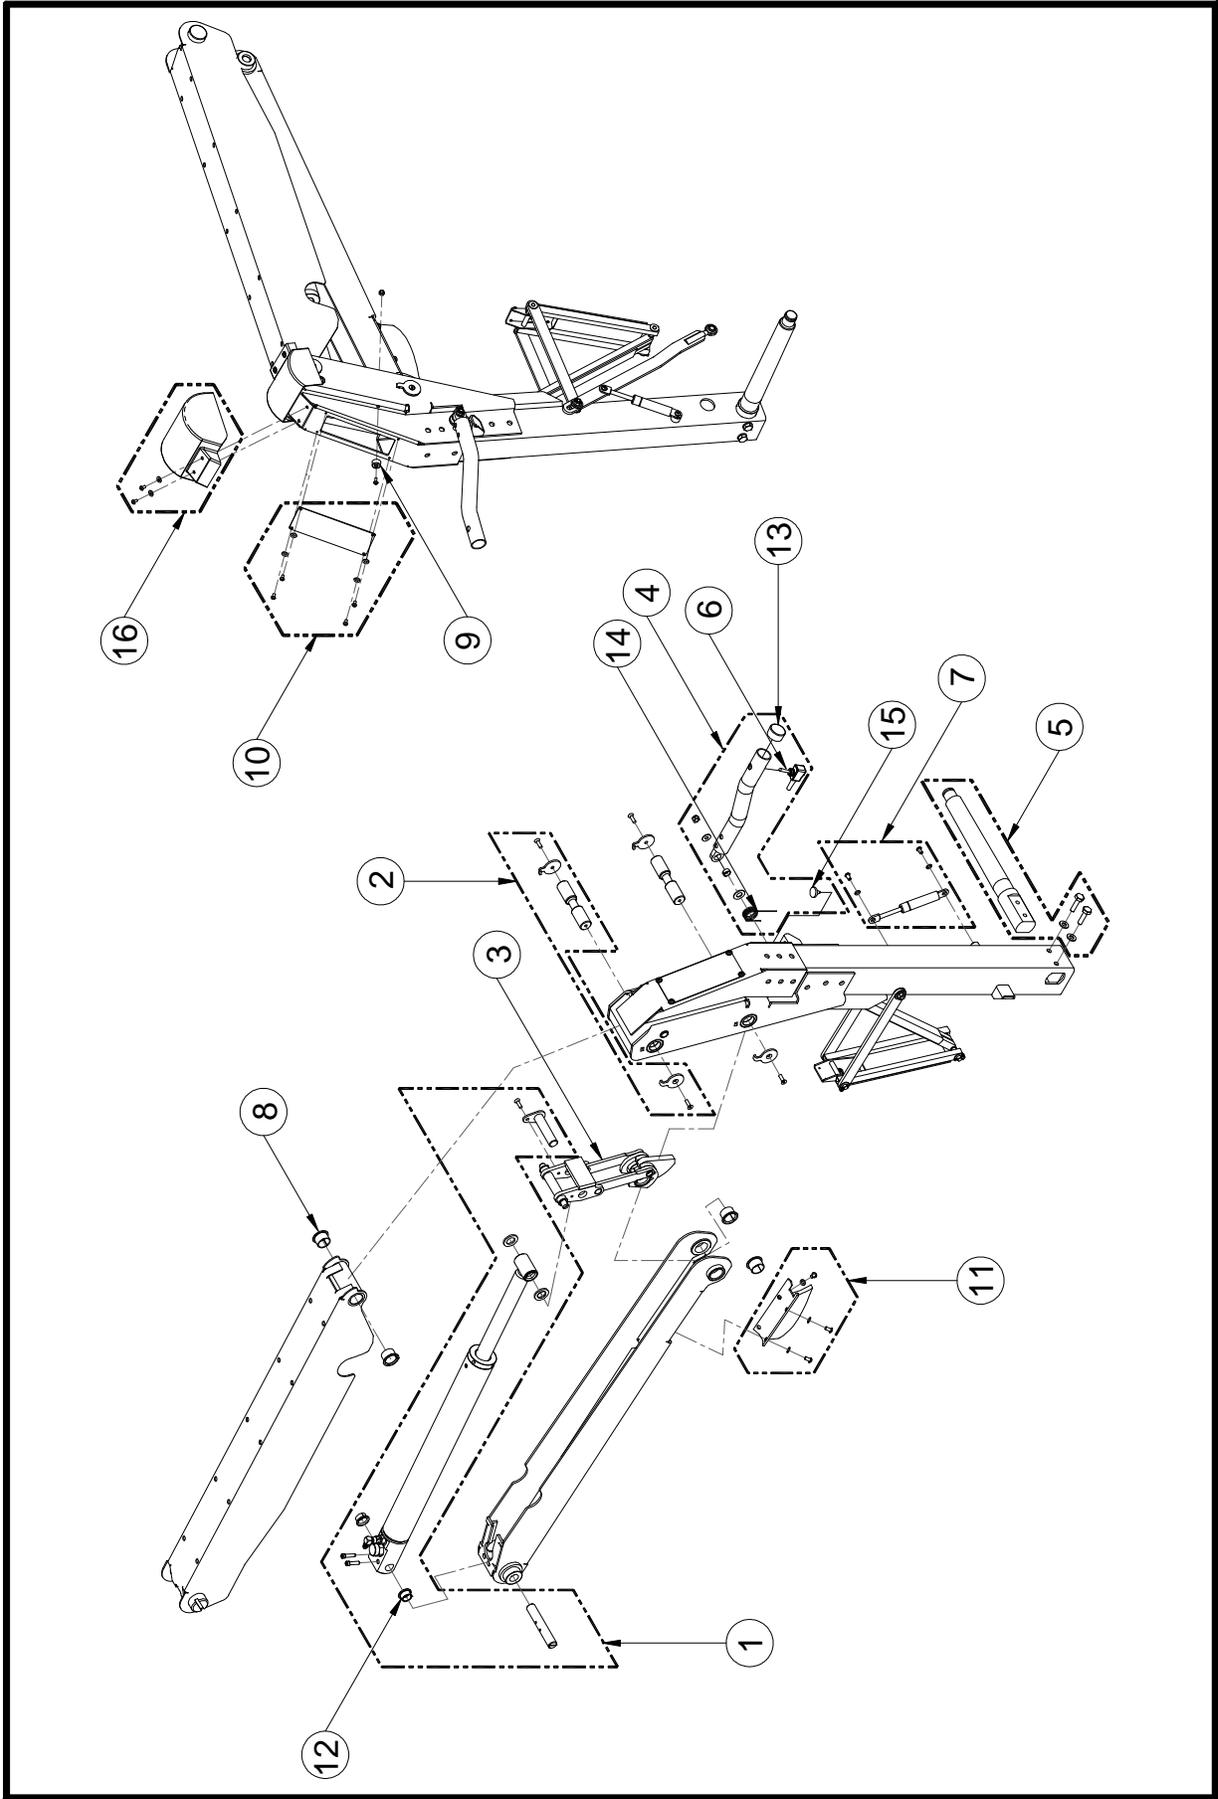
TRAVELING FRAME ASSEMBLY
